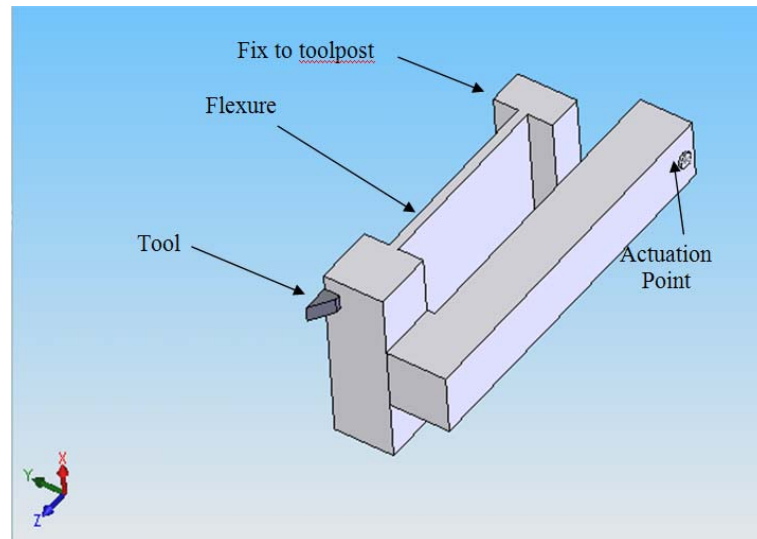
Flexure based tool rotation mechanism. A flexure that is very stiff in the vertical direction allows the tool to rotate in the Y-Z plane.
